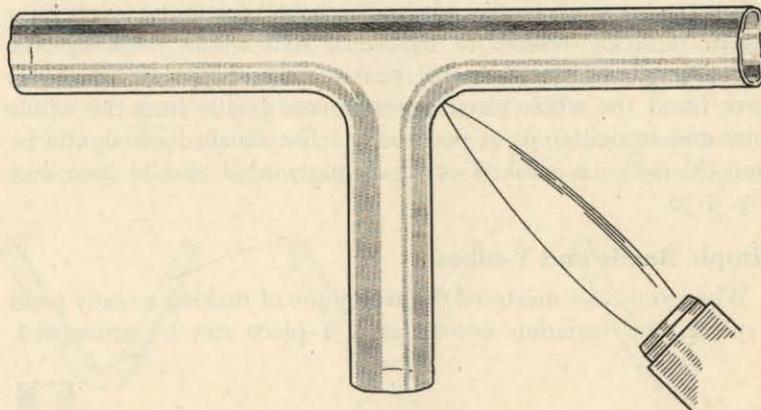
THE REDUCED FLAME IS USED TO FUSE THE JOINT
